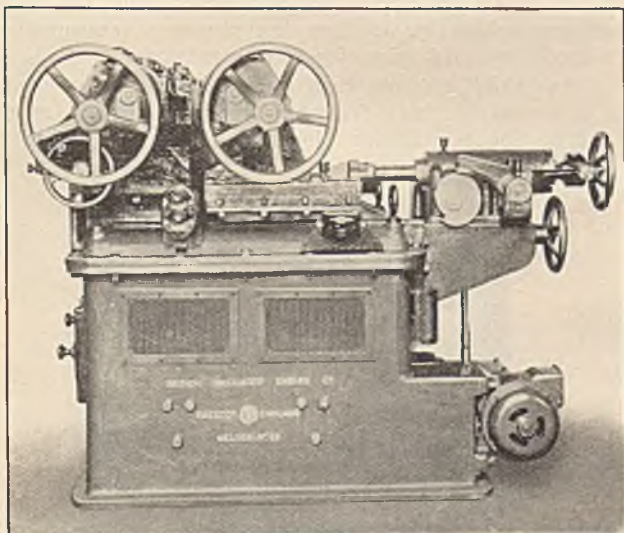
The Automatic Butt Welder for heavier work.
